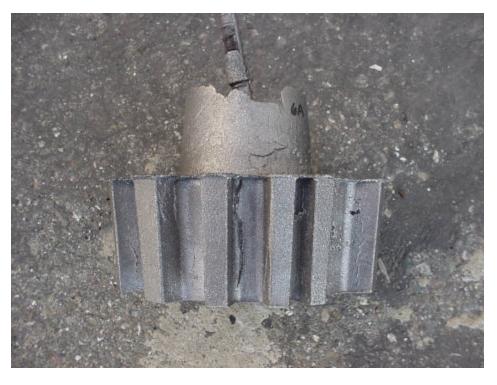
Mold FL004 Cavity A Casting Ranked 5 of 9
